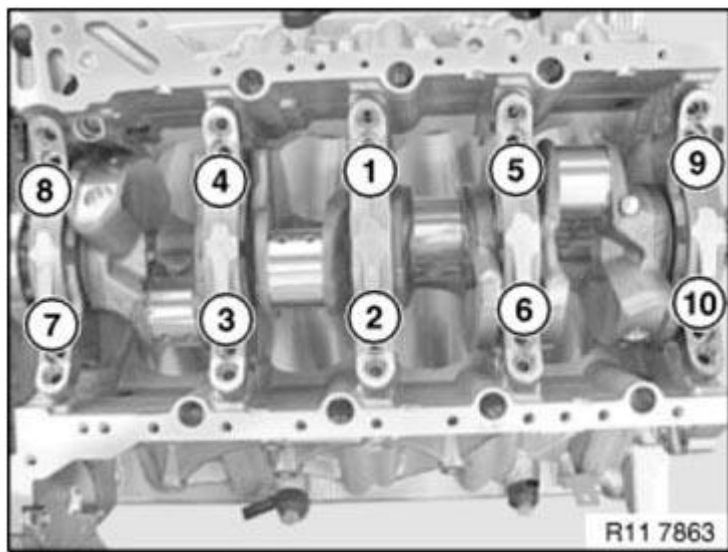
Identifying Collar Bolts (M11) Releasing Sequence
